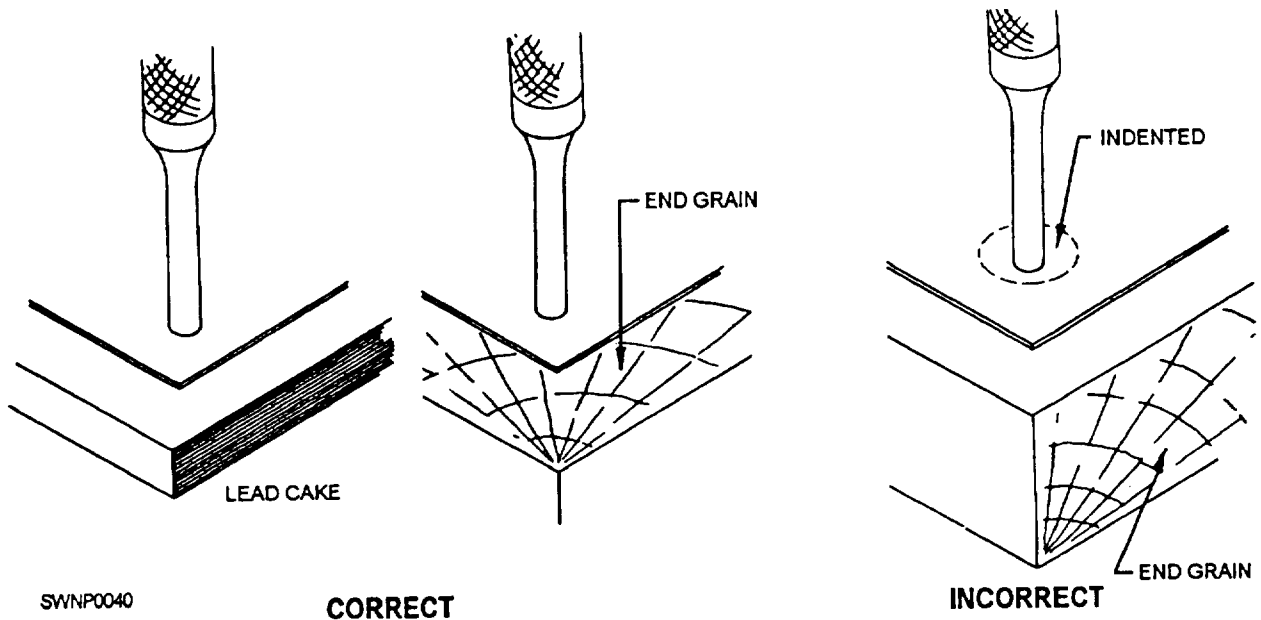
Correct method of backing sheet metal for making a hole with a punch.
